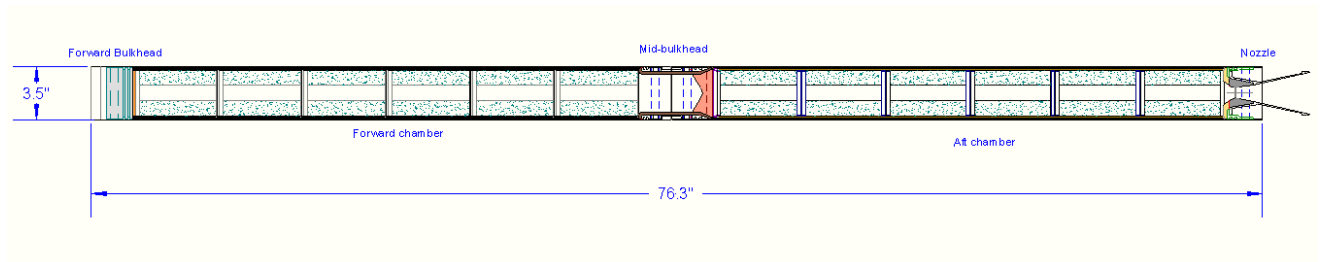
Basic dimensions and components of the Mark II motor assembly
